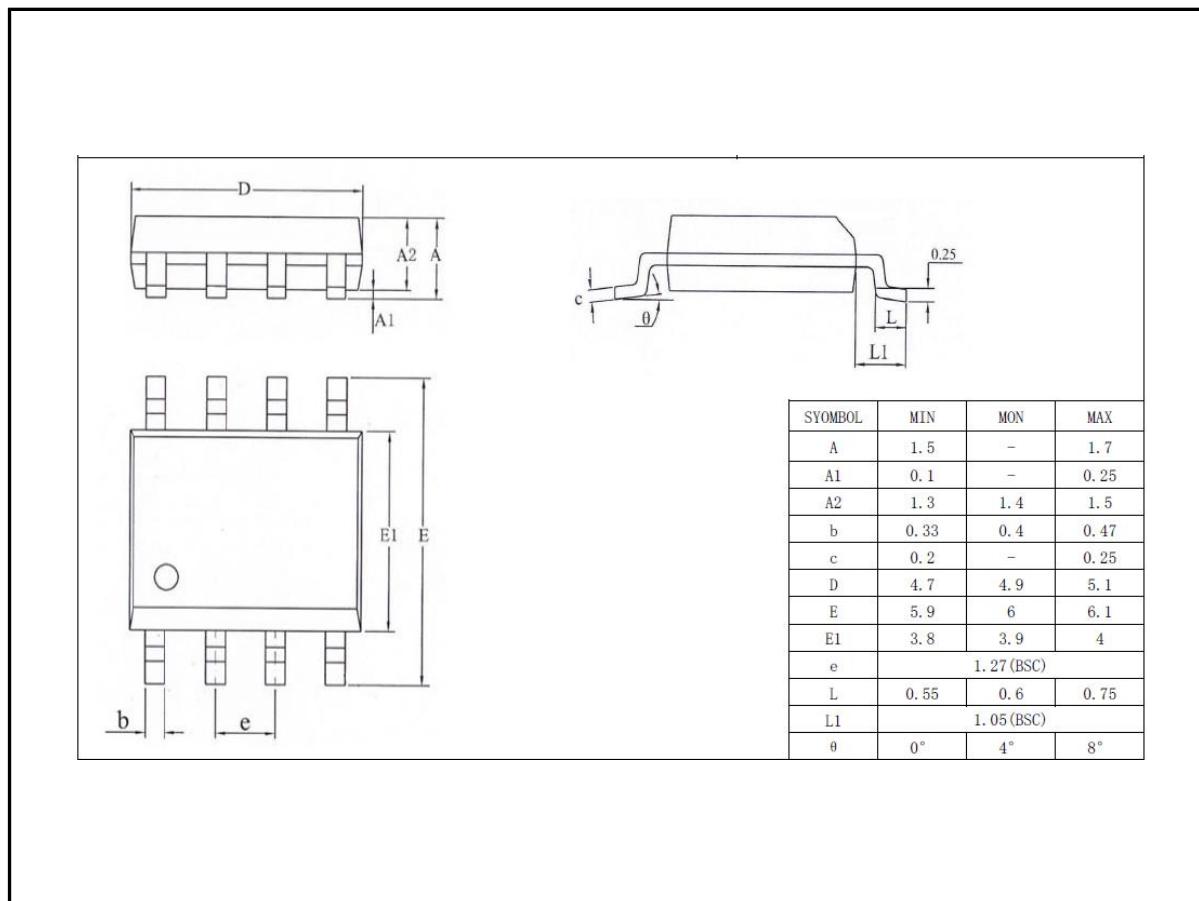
SOT23-8L Mechanical Data and Package Dimensions
